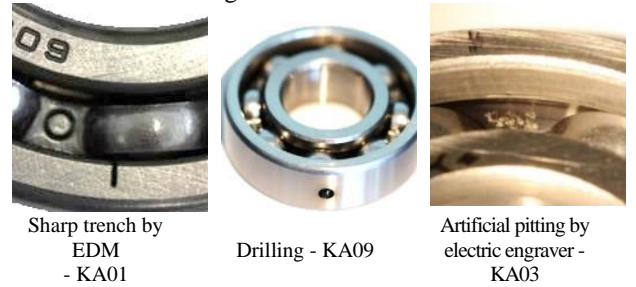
Example drawing of bearing damaged artificially.
